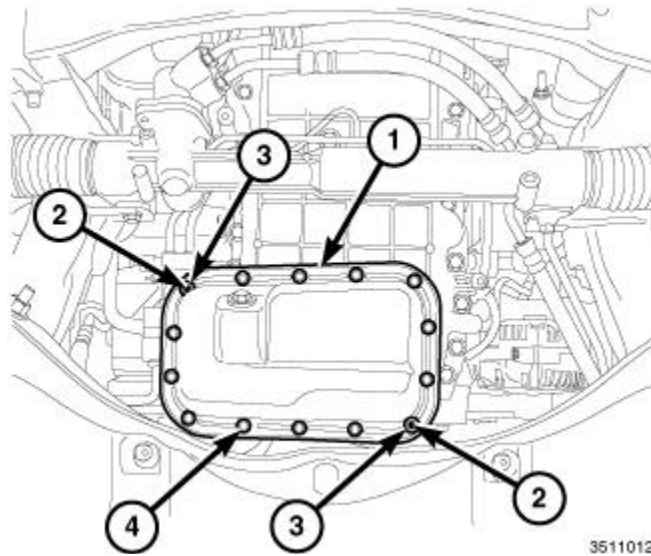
Bolts, Studs, Nuts & Lower Oil Pan
